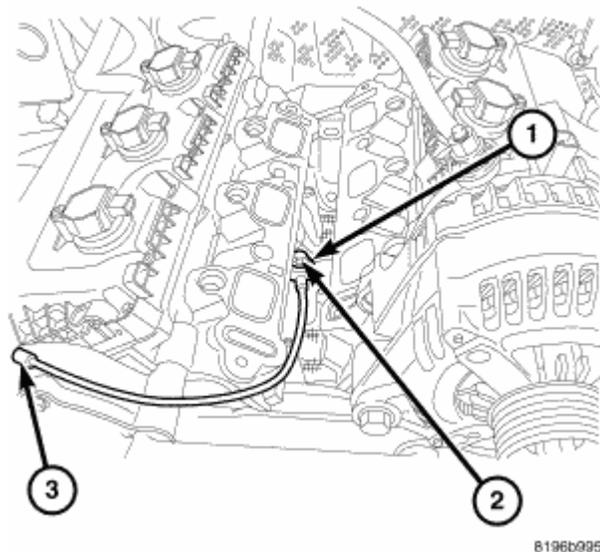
Identifying Sensor, Sensor Mounting Bolt & Engine
